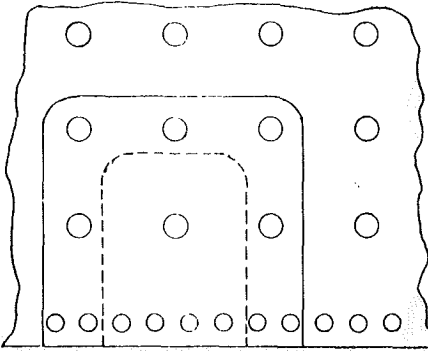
FLUSH OR BUTT-WELDED PATCHES
